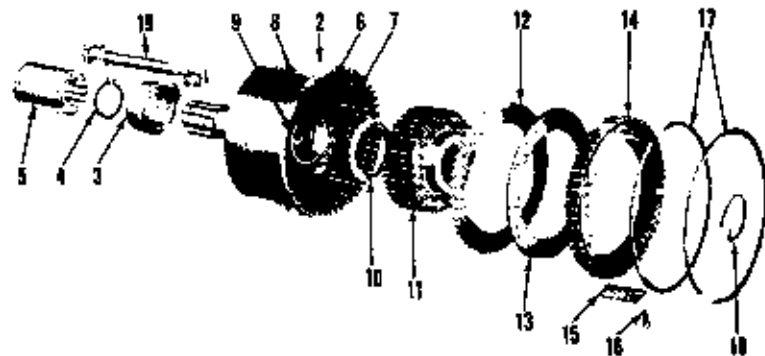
Exploded view of clutch unit. Mechanical lock-up of clutch is provided by engagement of splines in I.D. of pressure plate (14) in splines of clutch hub (11). Collector ring (3) must be free on shaft of clutch drum (2), yet fit closely to avoid oil leakage.
